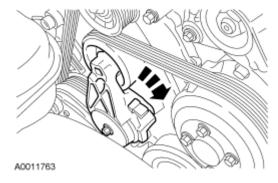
Rotating Tensioner Clockwise Courtesy of FORD MOTOR CO.
